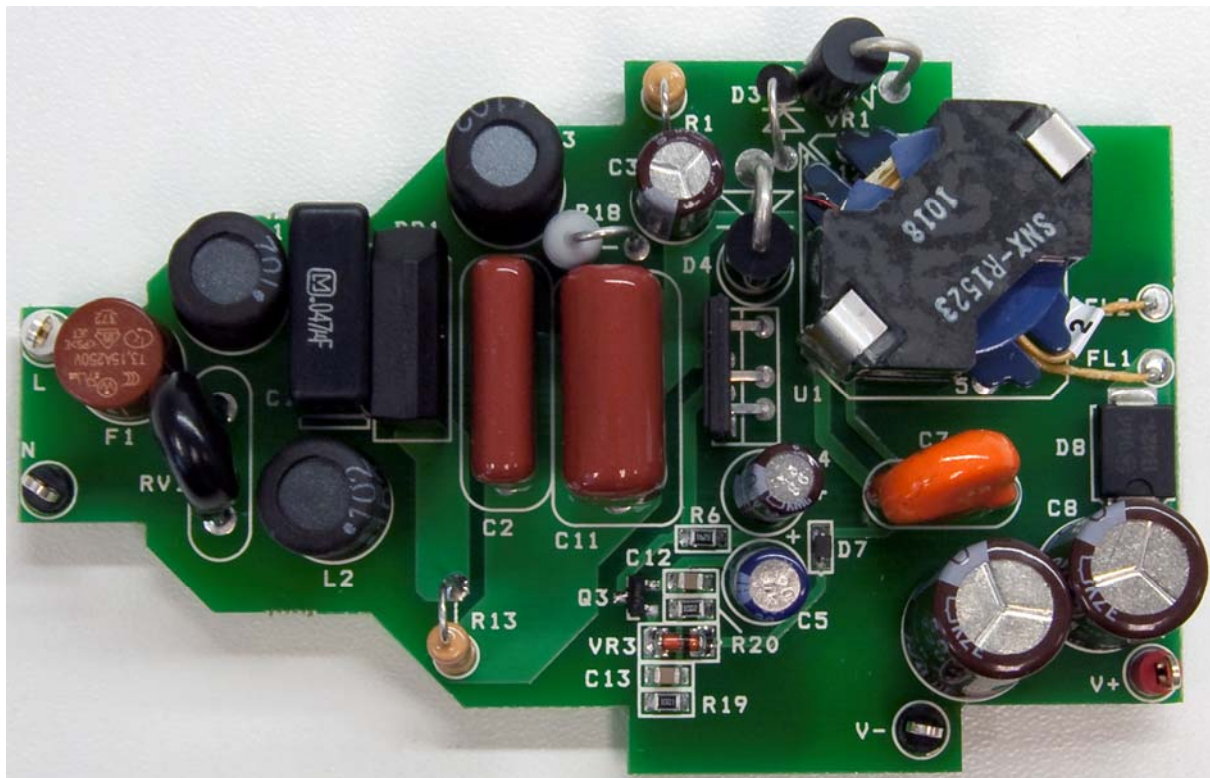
Populated Circuit Board Photograph (Top view). PCB Outline Designed to Fit Inside PAR38 Enclosure.
